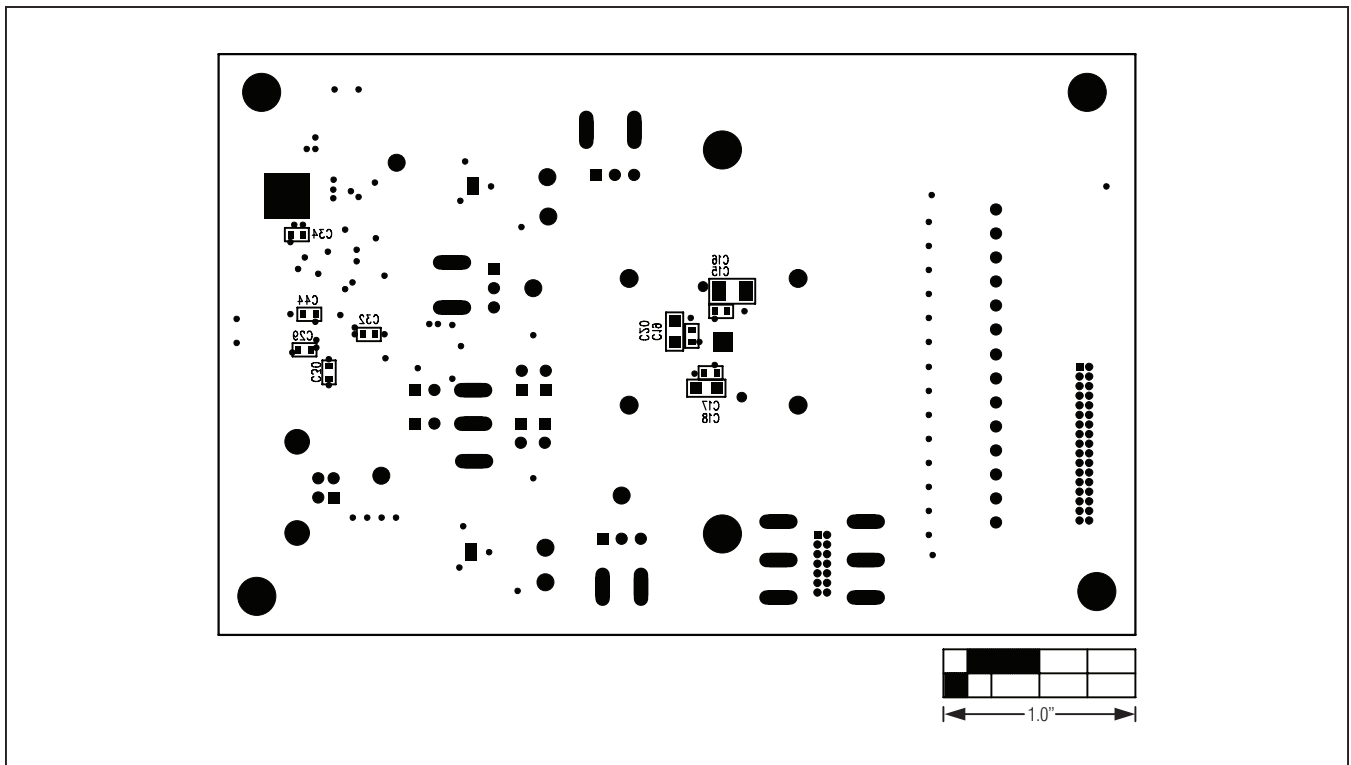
MAX9599 EV Kit Component Placement Guide—Solder Side
